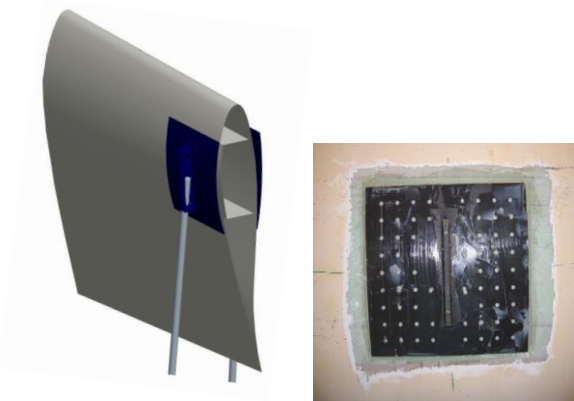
Load application using anchor plates. In the performed test the anchorplates glued to the blade had a surface area of 500x500mm.
